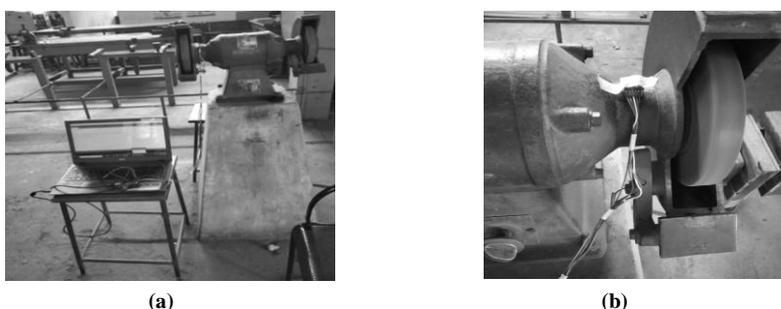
(a) Experimental setup - grinding wheel and (b) mounting of the accelerometer
